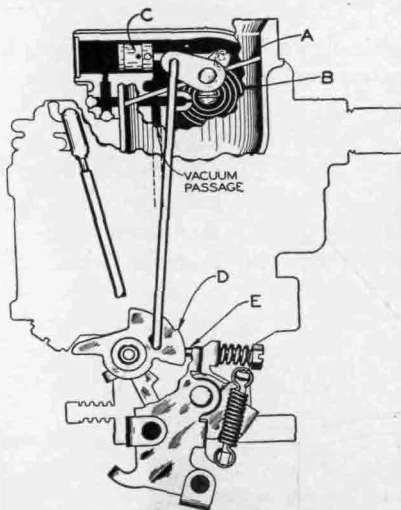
Stromberg choke control. This design is much like the one in Fig. 4-20 except for the placement of the vacuum piston *C* and choke valve *A*, and the manner of linking the vacuum piston and the thermostatic spring *B* together. *D* is fast-idle cam and *E* is idle adjustment screw. (Buick Motor Division of General Motors Corporation)
